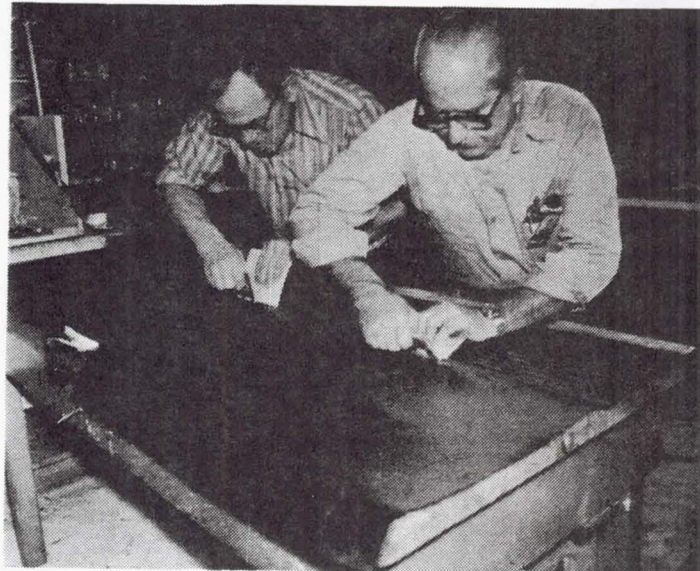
Graphite/epoxy fabric outer face sheet being formed to tool
